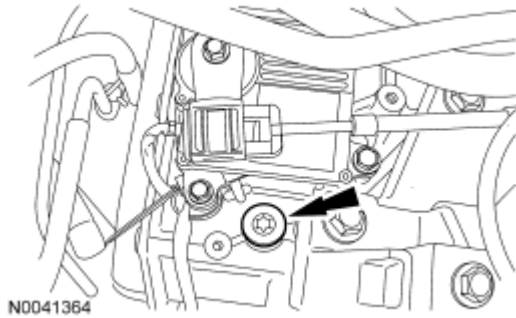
Locating Transmission Fluid Cooler Tube Bolts
